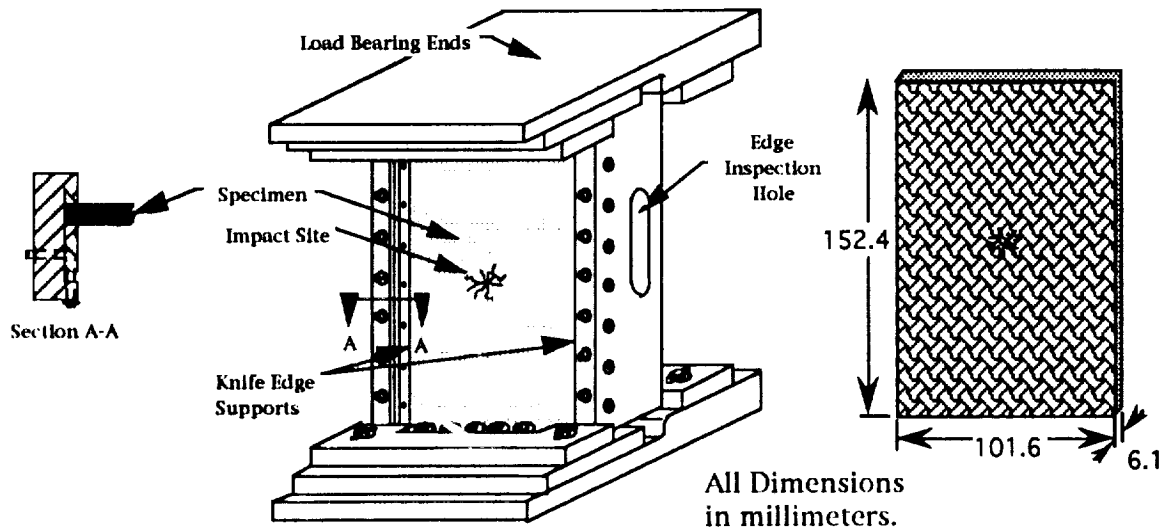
Post-Impact Compression Fatigue Test Fixture and Specimen Geometry
